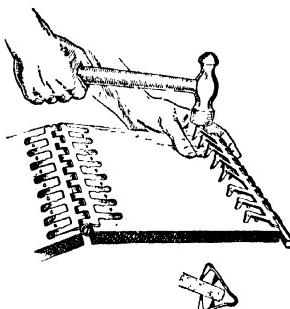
Metal fastener with steel or rawhide hinge pin.
